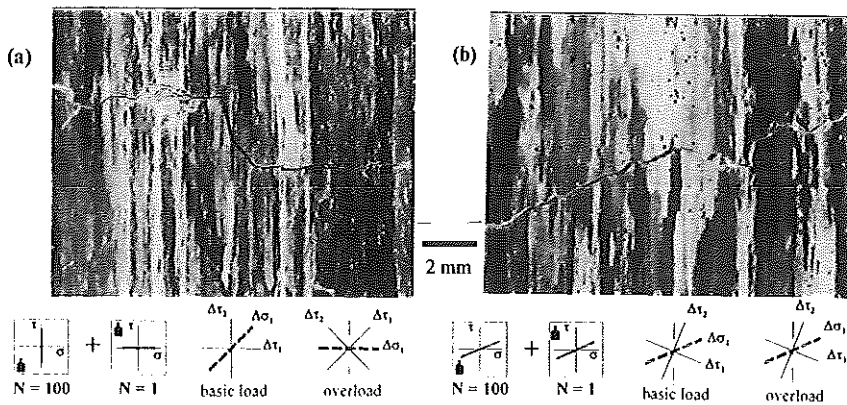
Main cracks in two-stage blockloading with single overload after each block of 100 cycles on the base level: branched crack (a), stage II crack (b).
